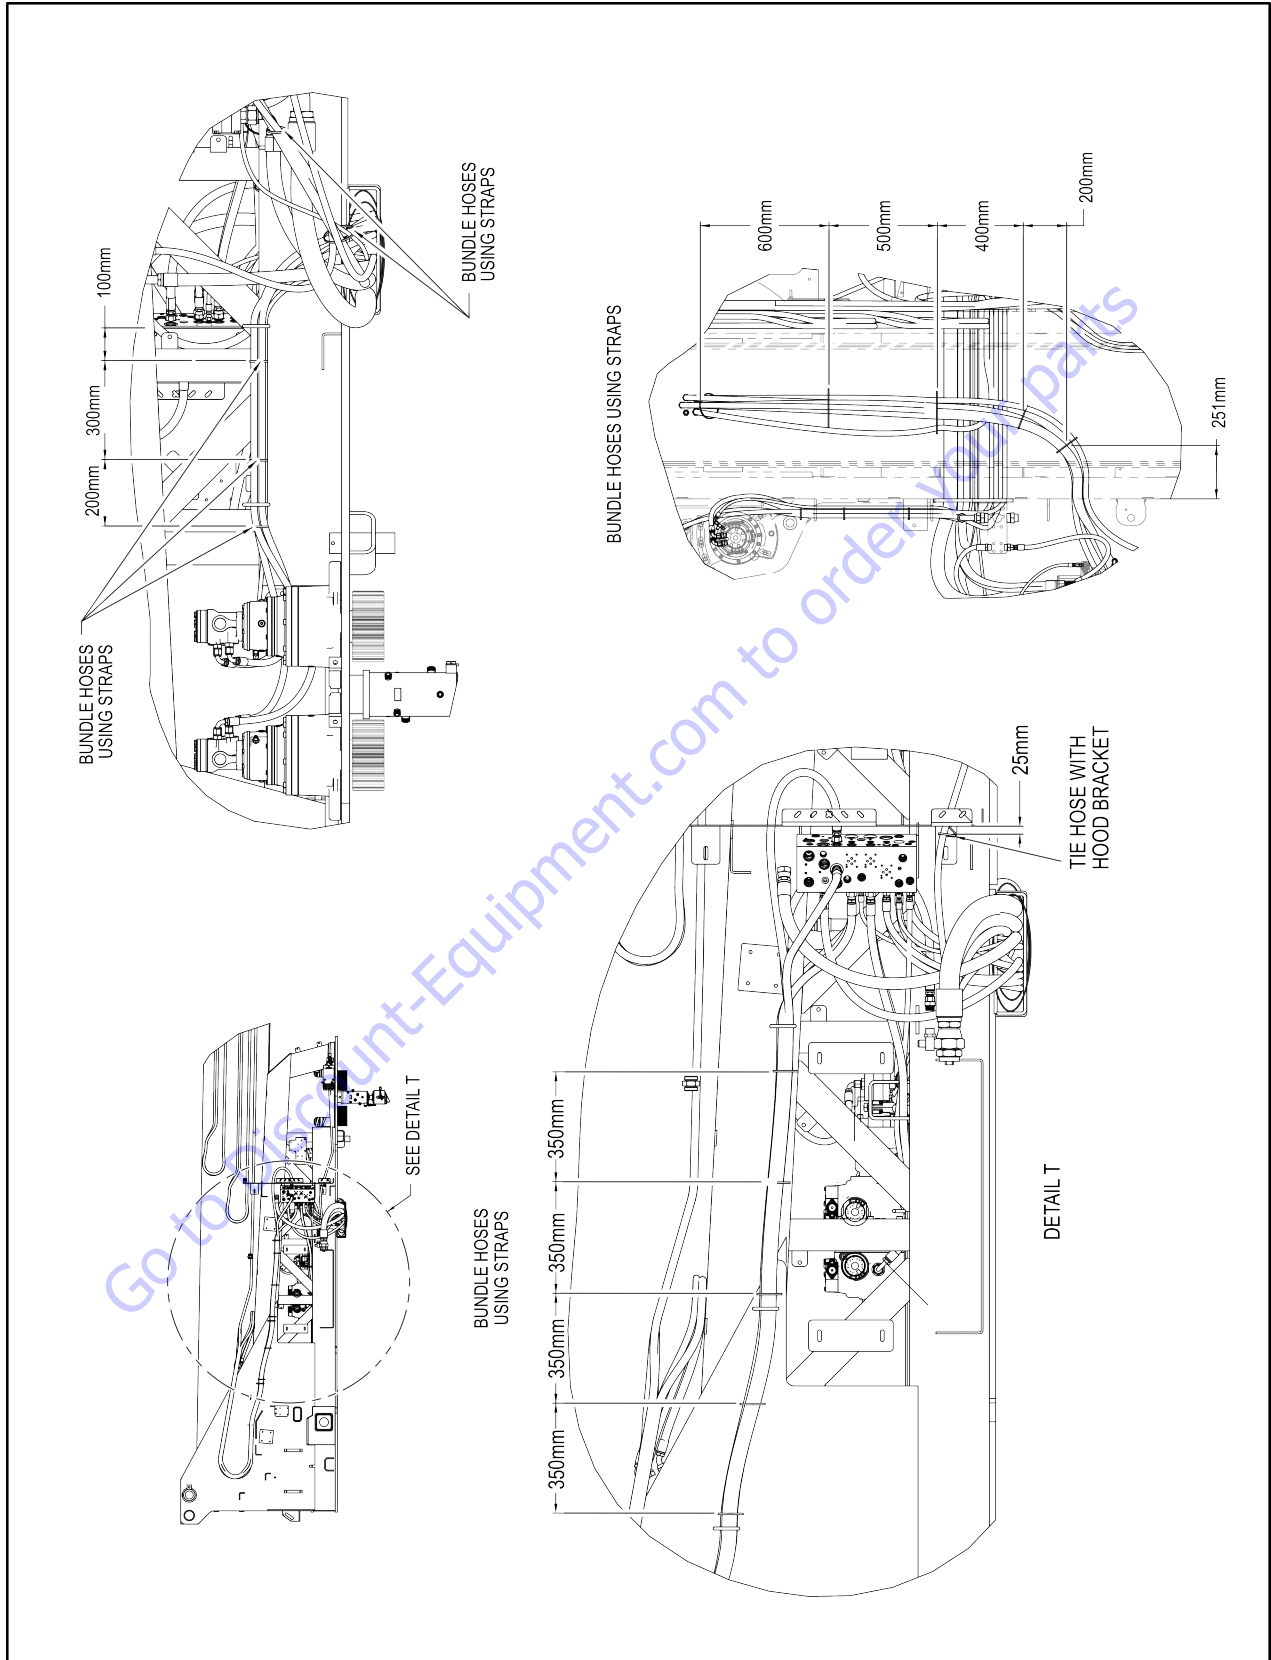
Hydraulic Hose Installation - Sheet 7 of 8
